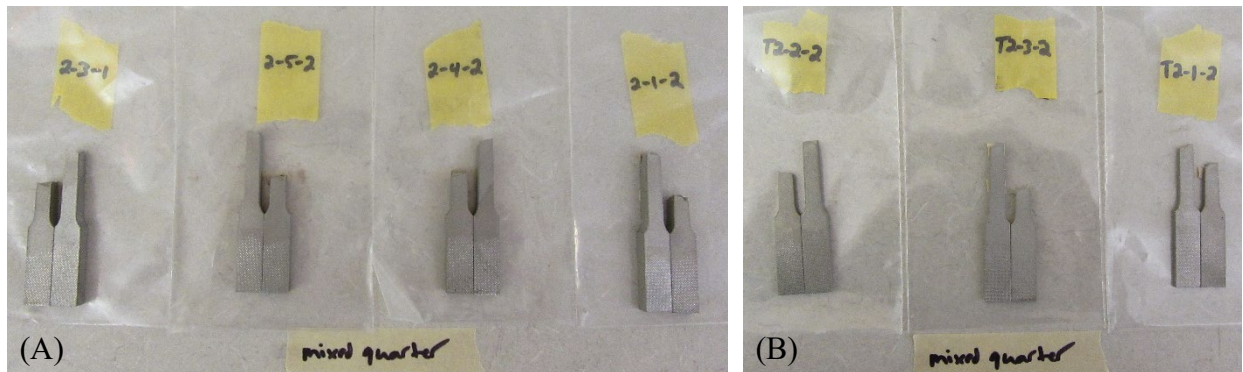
Fractured tensile specimens with mixed exposure, where the bottom half of the sample received standard single laser exposure and the top half of the sample received quarter laser power secondary exposure. (A) 6mm standard width specimens, and (B) 2mm thin width specimens.
